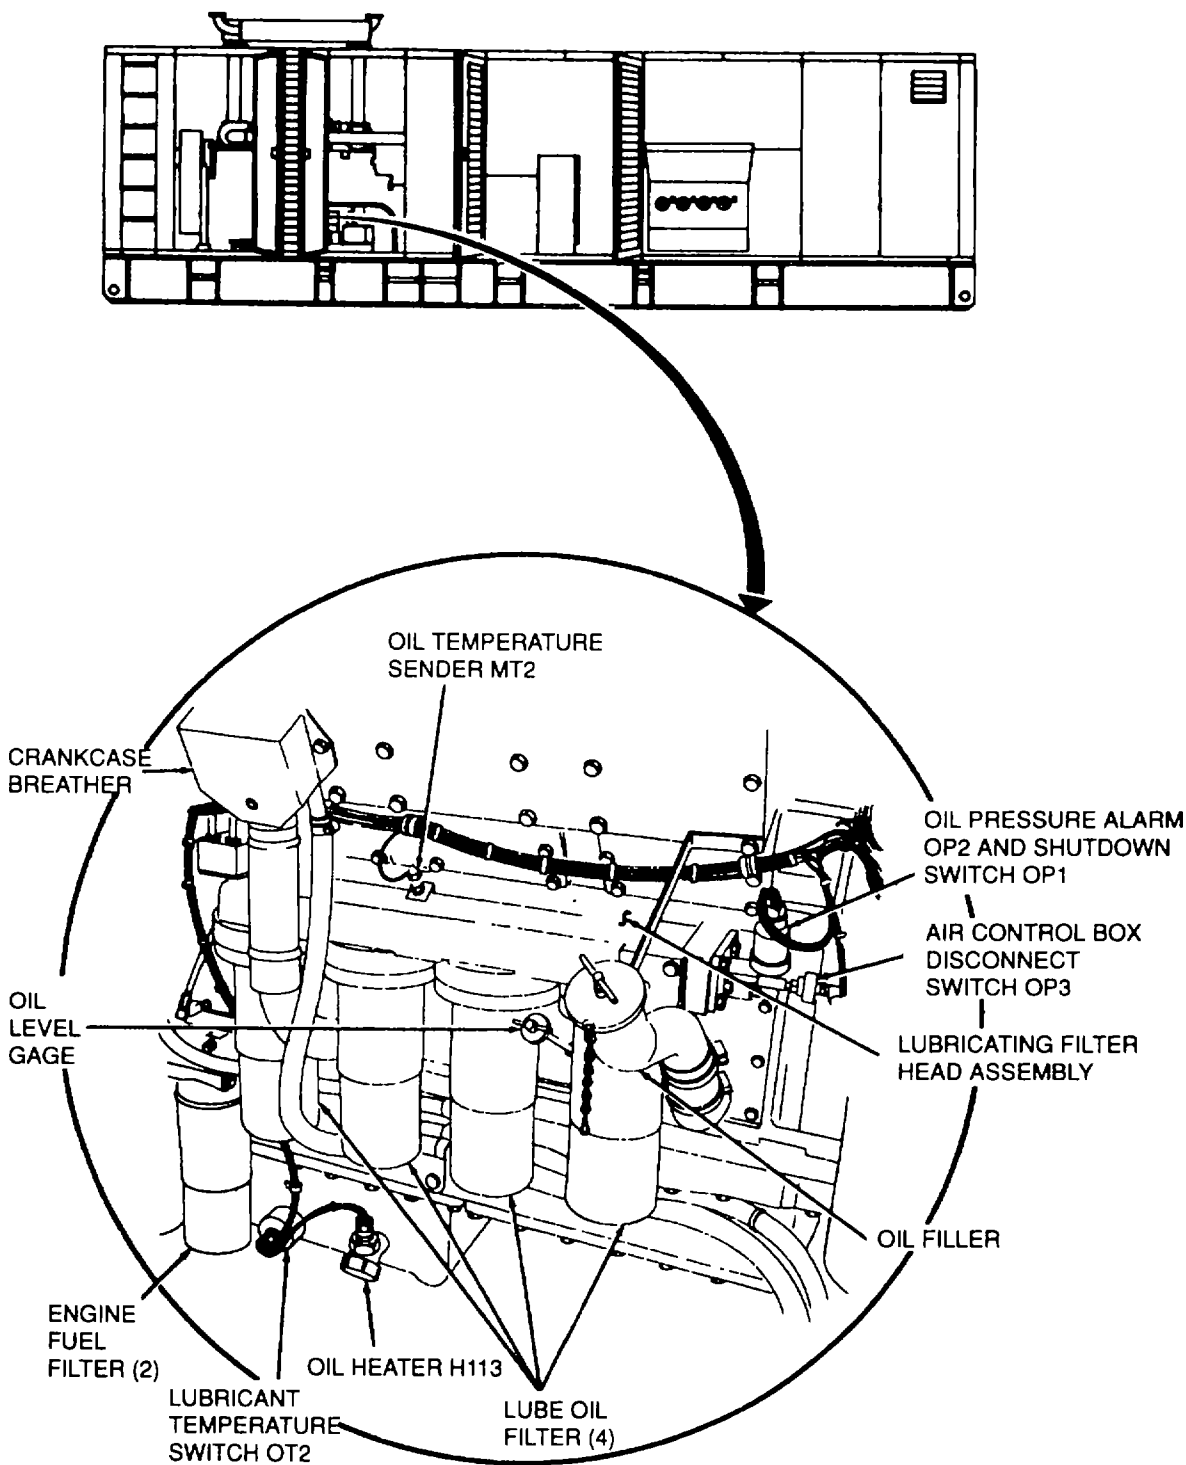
Generator Set - View Into Left Side of Engine Compartment (Sheet 2 of 2)
